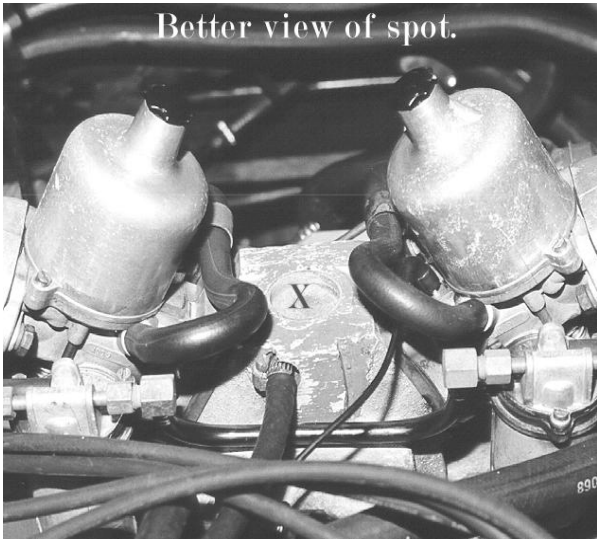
Close up view of the selected location where the connecting blind plug will be fitted. ' X '
